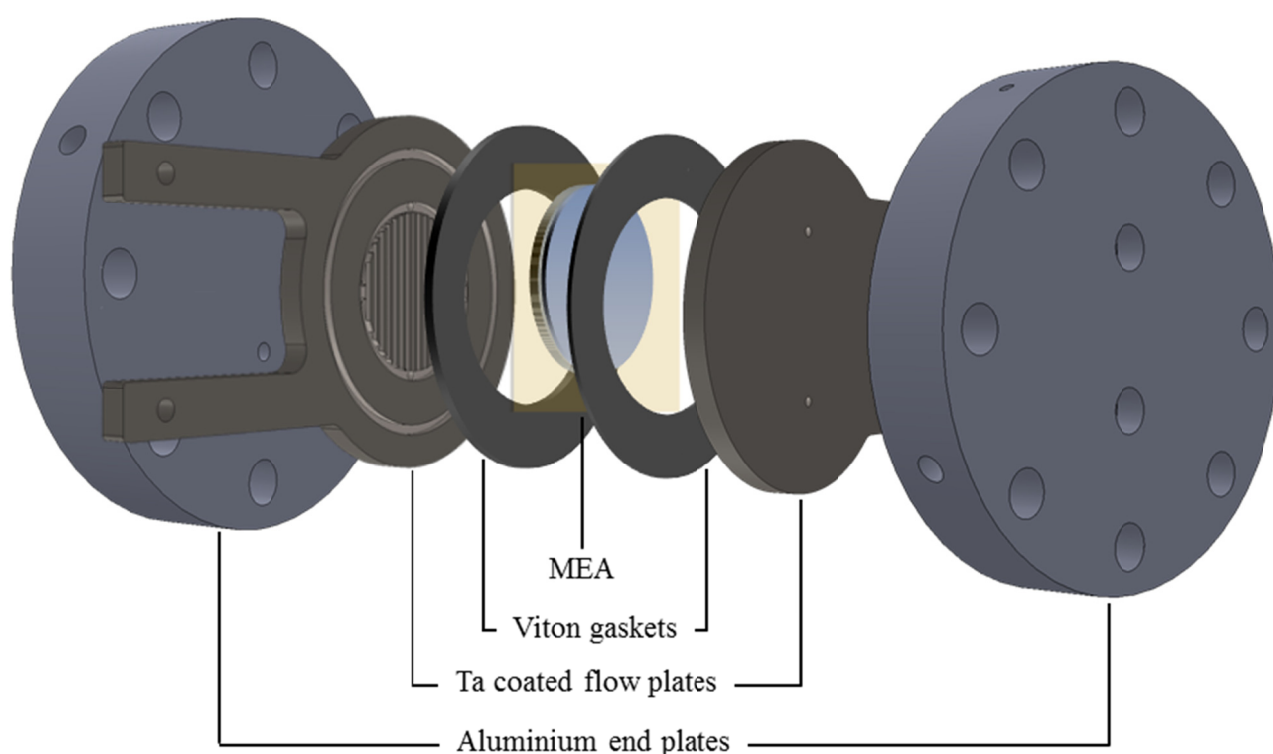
Schematic exploded view of the electrolysis cell used for the experiments.
